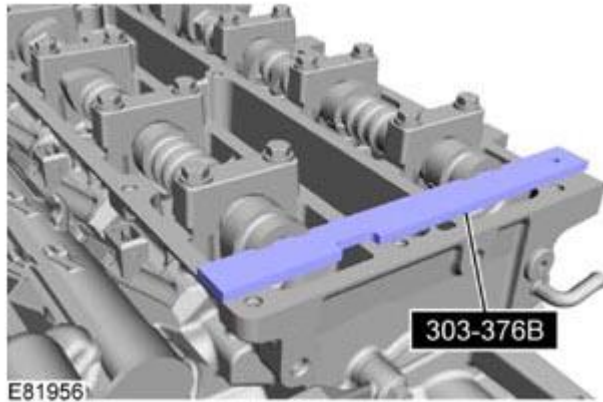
Installing Camshaft Alignment Plate Into End Of Camshafts
